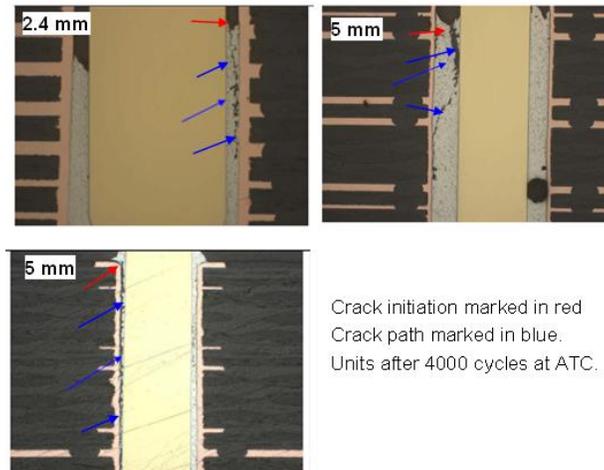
Cracking of PTH solder joints after 4000 ATC cycles.
